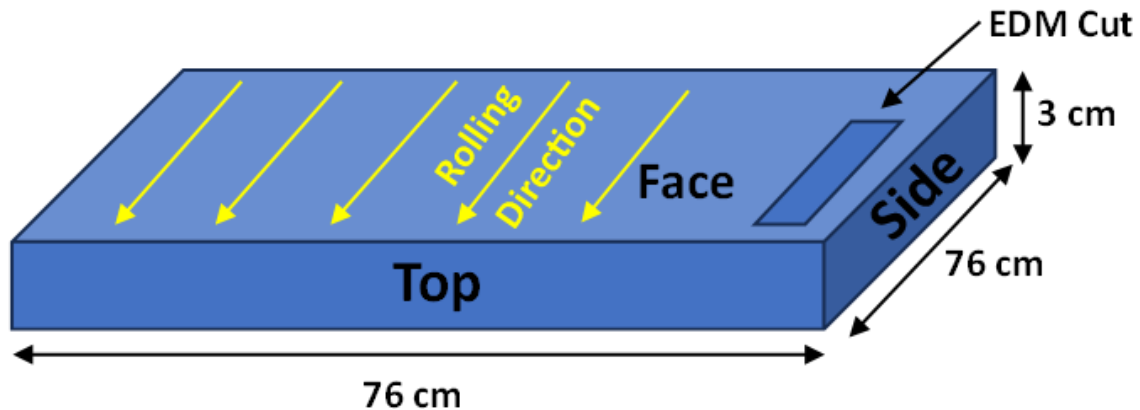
As received ArmoX 500T bulk material size, rolling direction, and EDM cutting surface for tensile specimen
